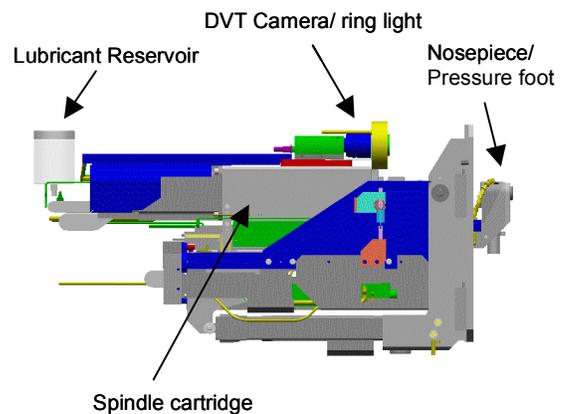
NCDJ Spindle Assembly with Pressure Foot.
